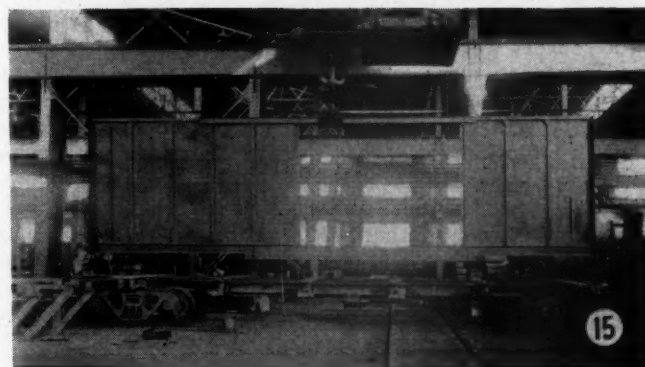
The roof assembly jig—Fig. 13: The roof sheets in place before welding on the running board—Fig. 14: The fabricated car sides as received at the shop—Fig. 15: Applying the car sides to the underframe—Fig. 16: One of the cars at the completion of the superstructure assembling operation—Fig. 17: Fastening down the metal door sill with an electric screw driver—Fig. 18: The template used for locating the holes to be bored in the floor for the auto loader
